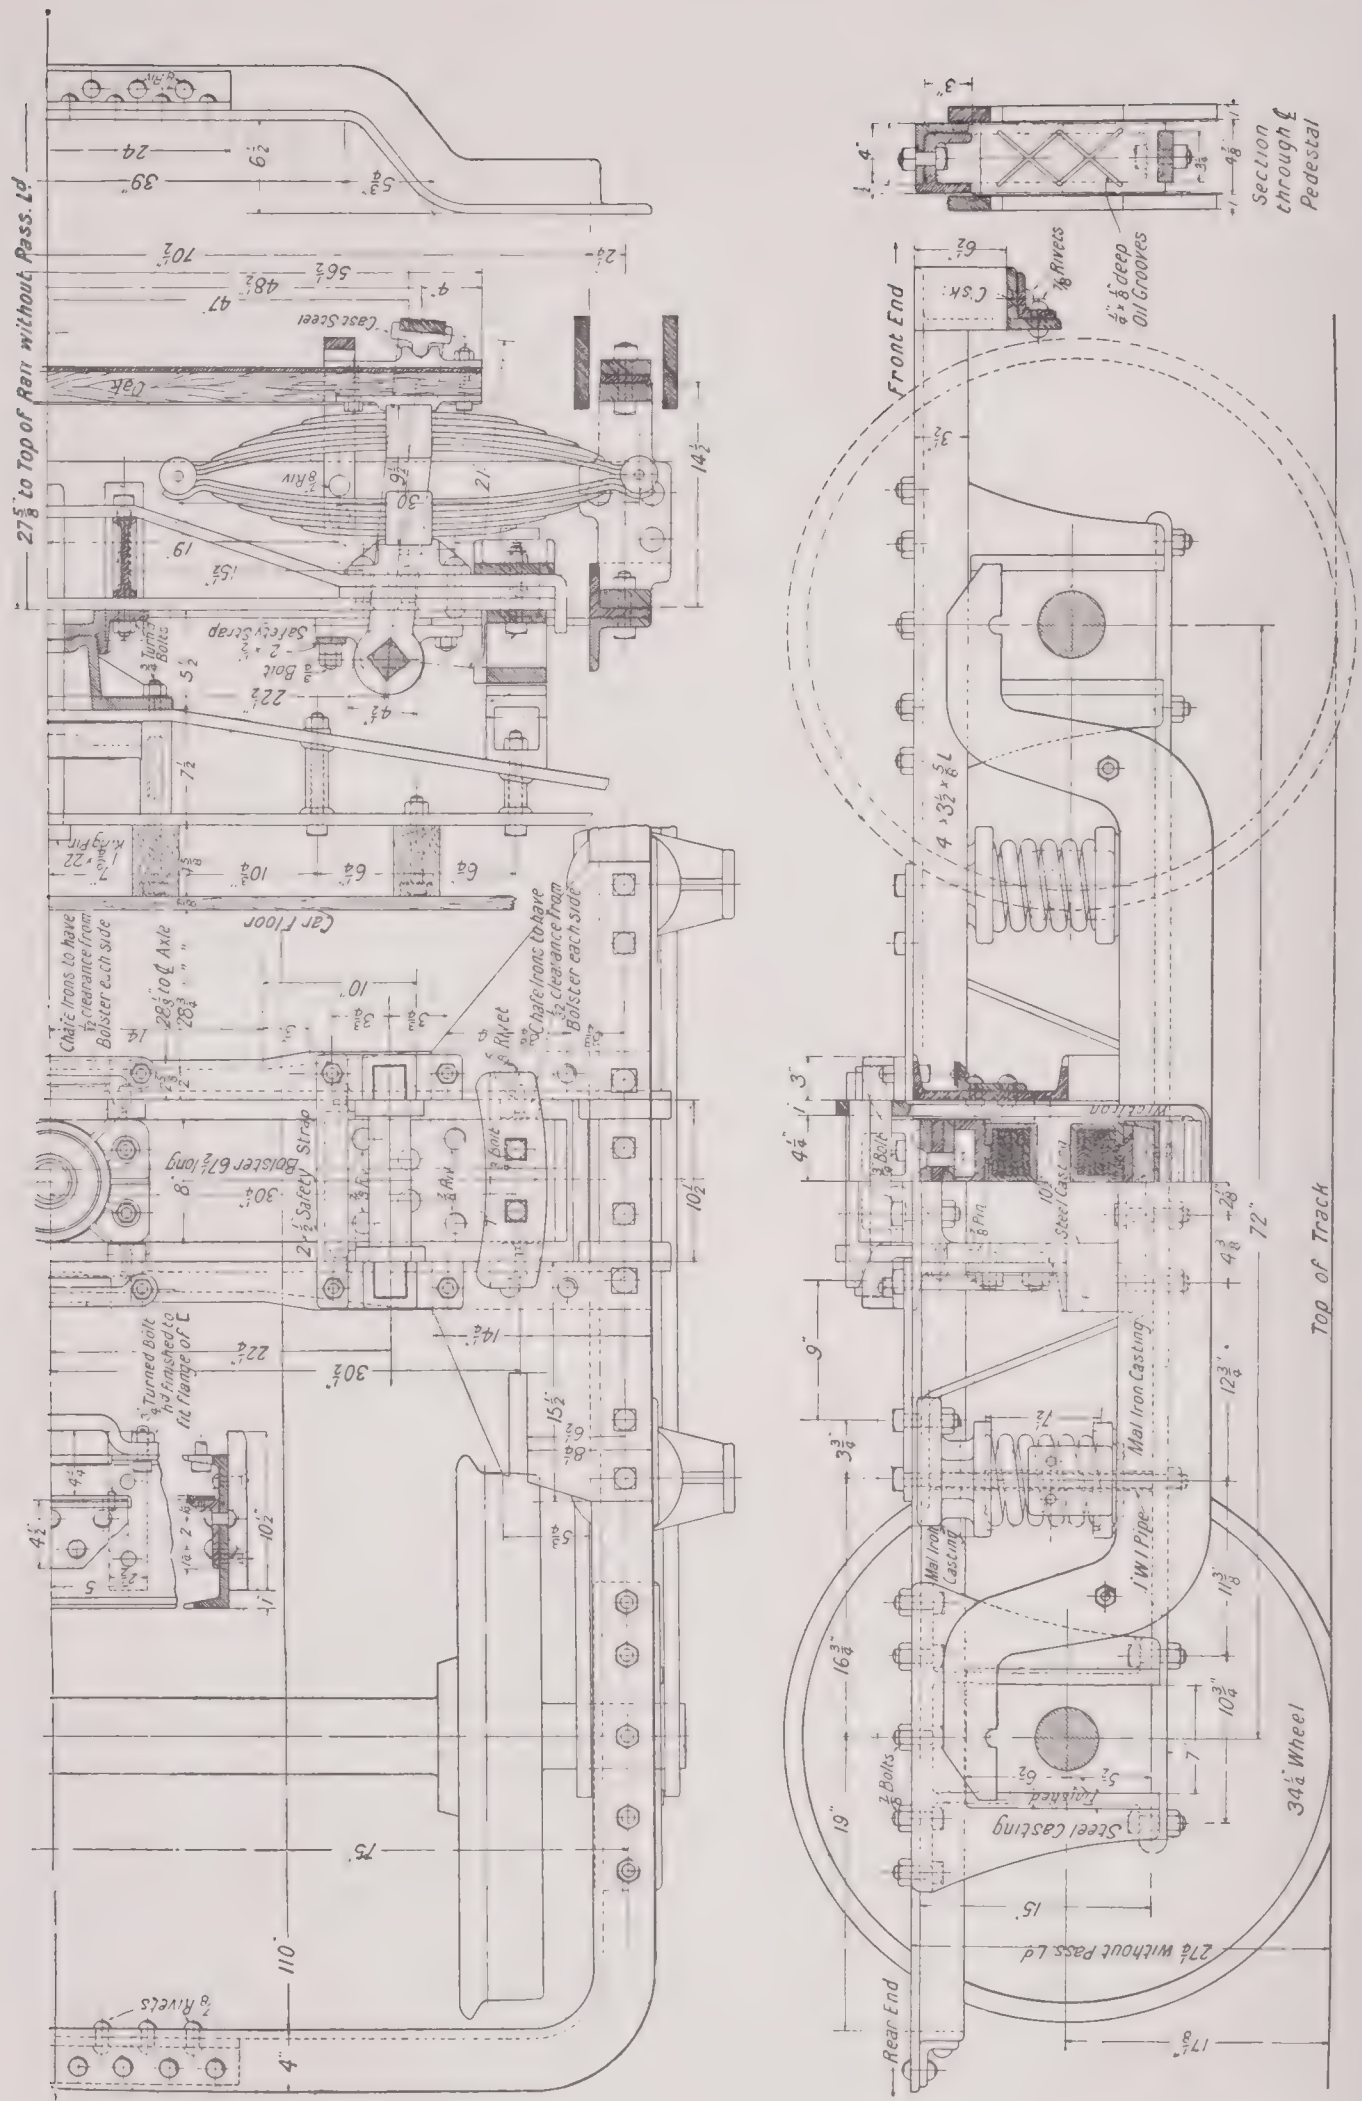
GENERAL ASSEMBLY OF MOTOR TRUCK FOR THE MOTOR CARRIAGES OF THE MANHATTAN ELEVATED RAILWAY.
